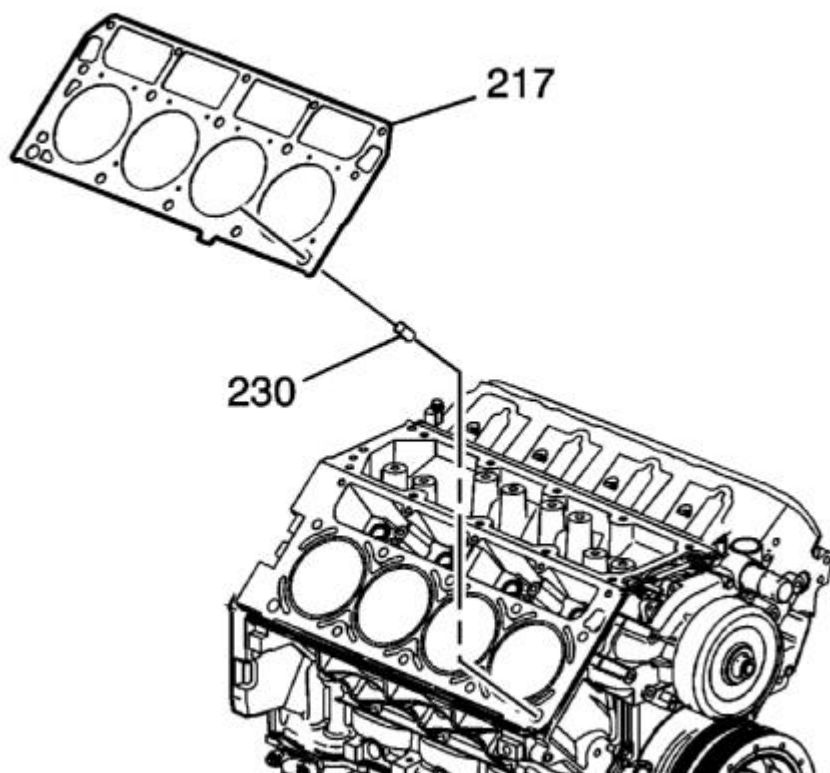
Cylinder Head Gasket & Locating Pins - Right
